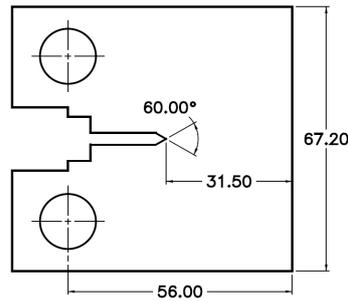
Schematic drawing of CT specimen design (dimensions in mm).
